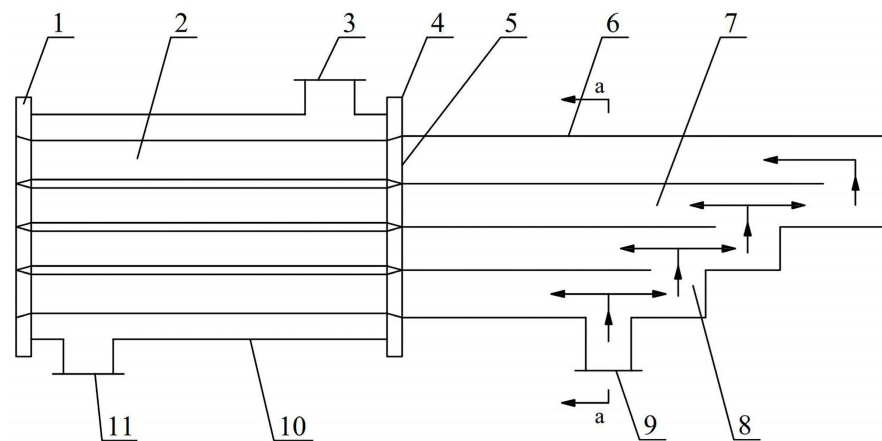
Structure drawing of special heat exchanger for sewage. 1—left tube plate; 2—multi-layer heat exchanger tube; 3—media outlet; 4—right tube plate; 5—inlet; 6—diversion type shell; 7—separation flow channel; 8—flow channel separation port; 9—sewage inlet; 10—shell; 11—media inlet.
